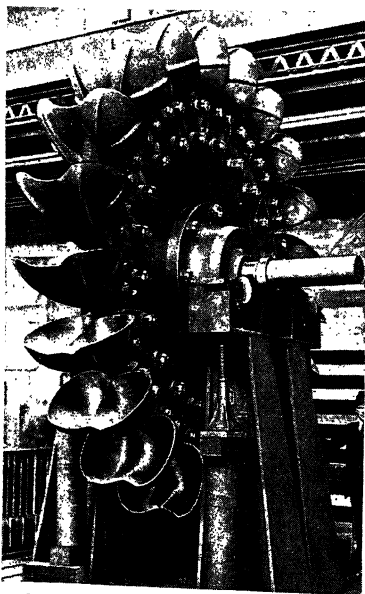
Bucket wheel for 30,000 hp. Weight of assembled wheel 25 tons. (Courtesy Allis-Chalmers.)
